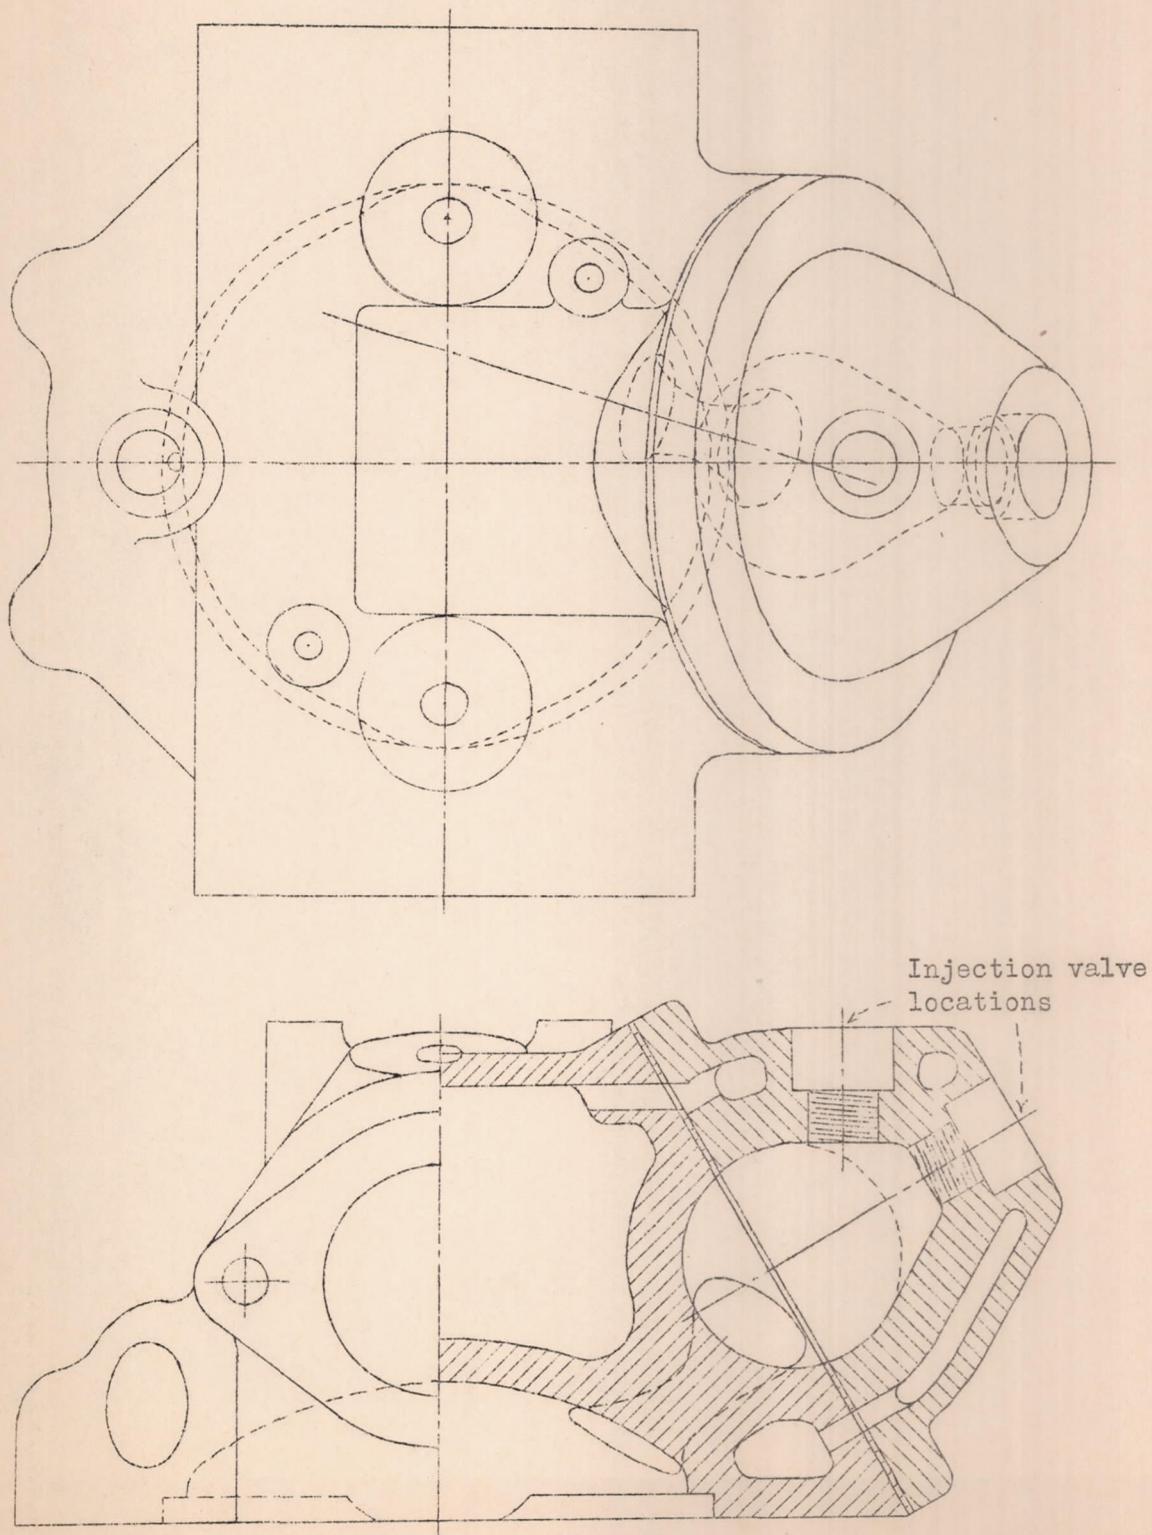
N.A.C.A. cylinder-head design No. 3 showing pear-shaped and spherical (dotted) chamber forms. Passage throat diameter  $9/16$  inch.
